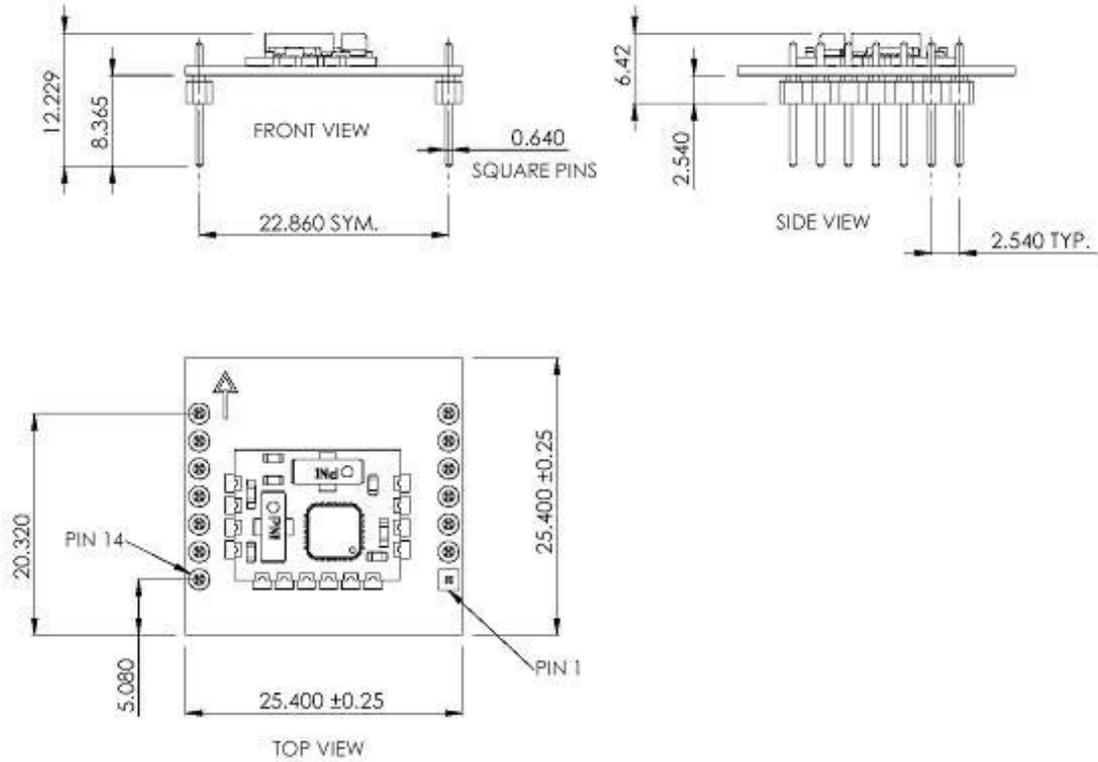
MicroMag2-on-Carrier Mechanical Drawing
